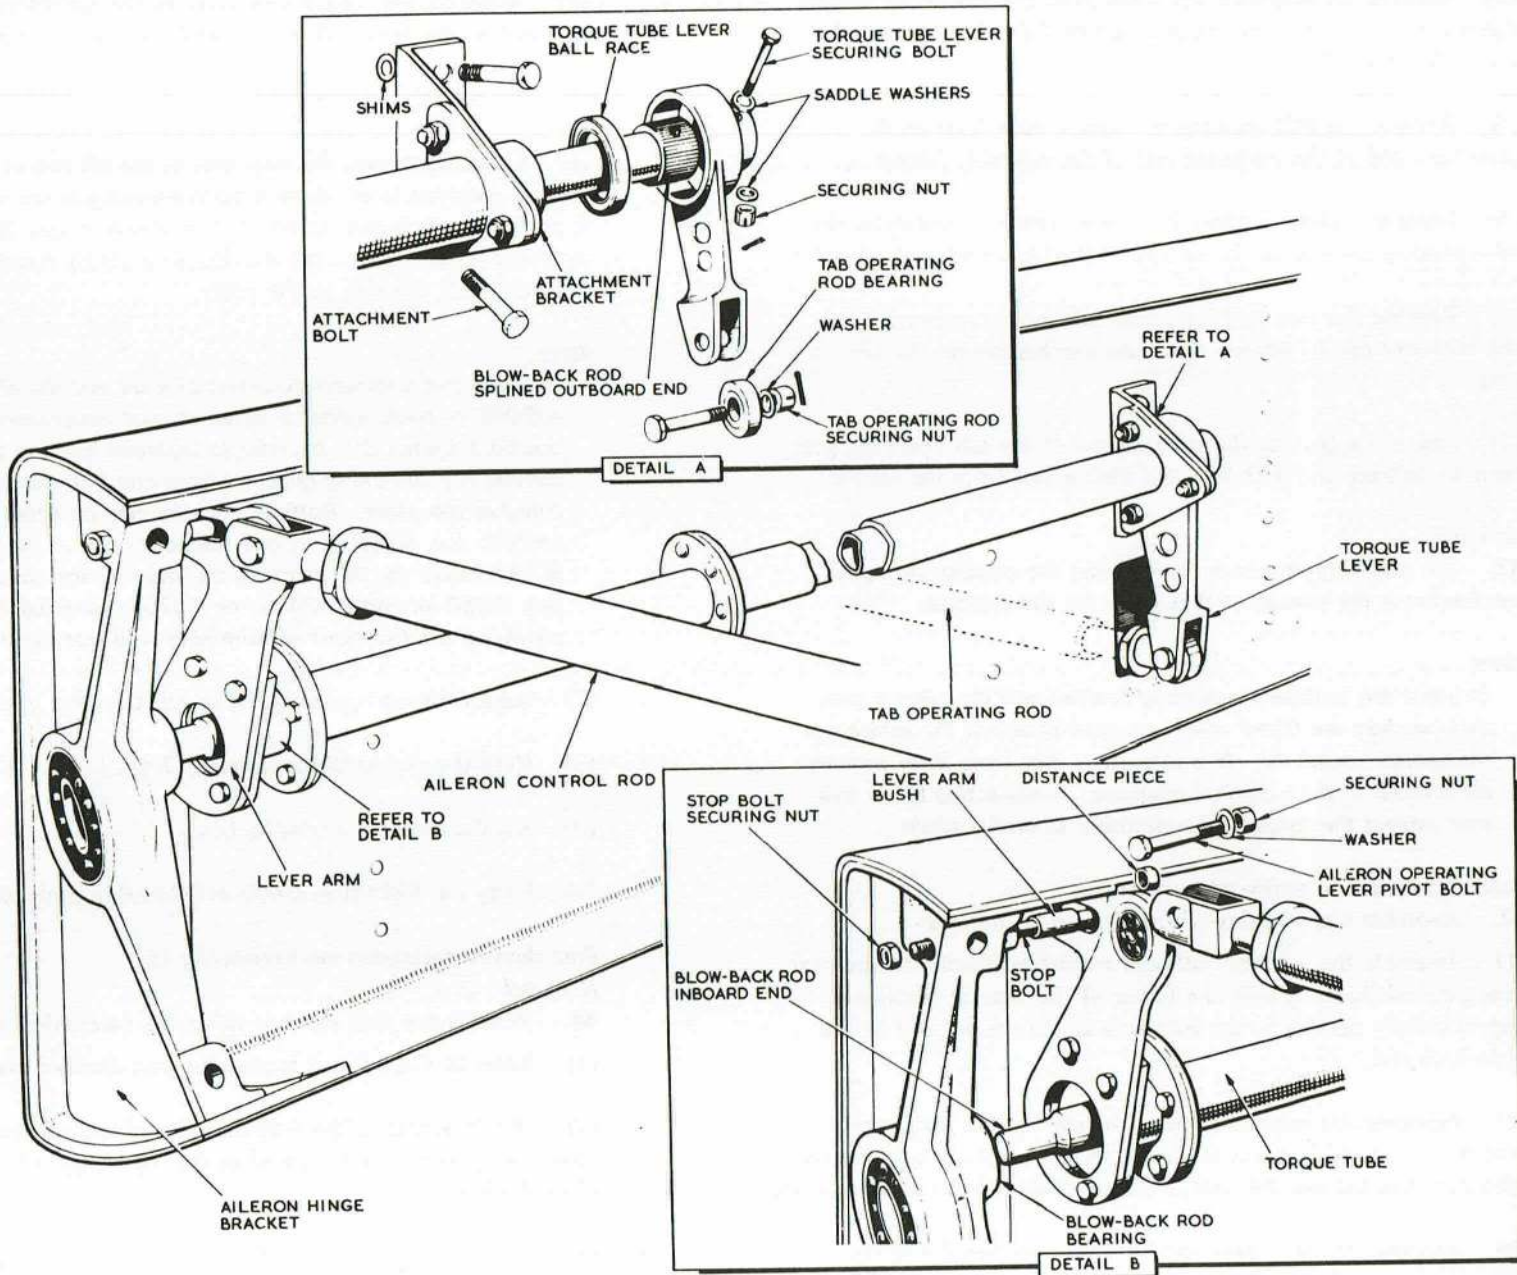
AILERON SPRING-TAB MECHANISM REMOVAL
